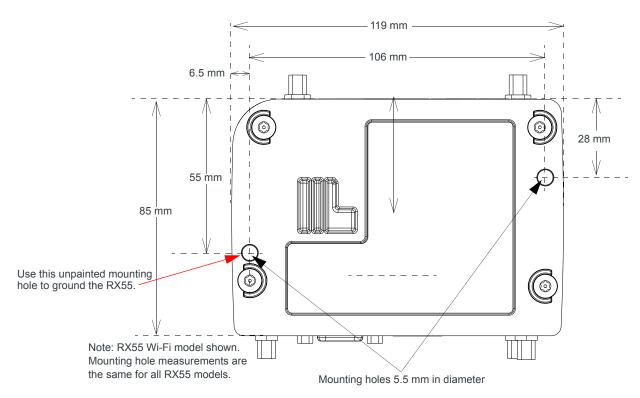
RX55 Router Mounting Hole Locations and Dimensions
